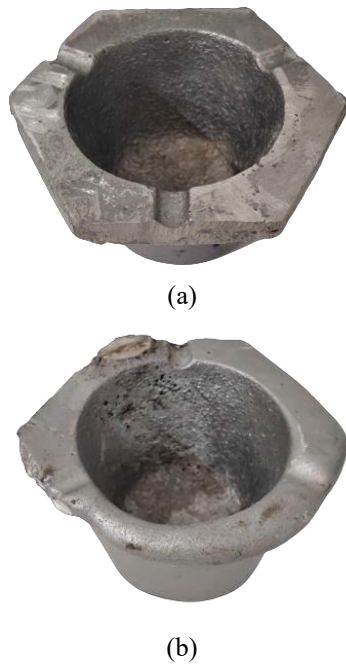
Specimen (a) casting product (variation 1), (b) casting product (variation 2)
